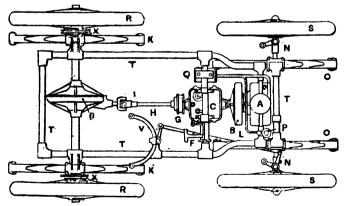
PLAN OF RENAULT VOITURETTE.
